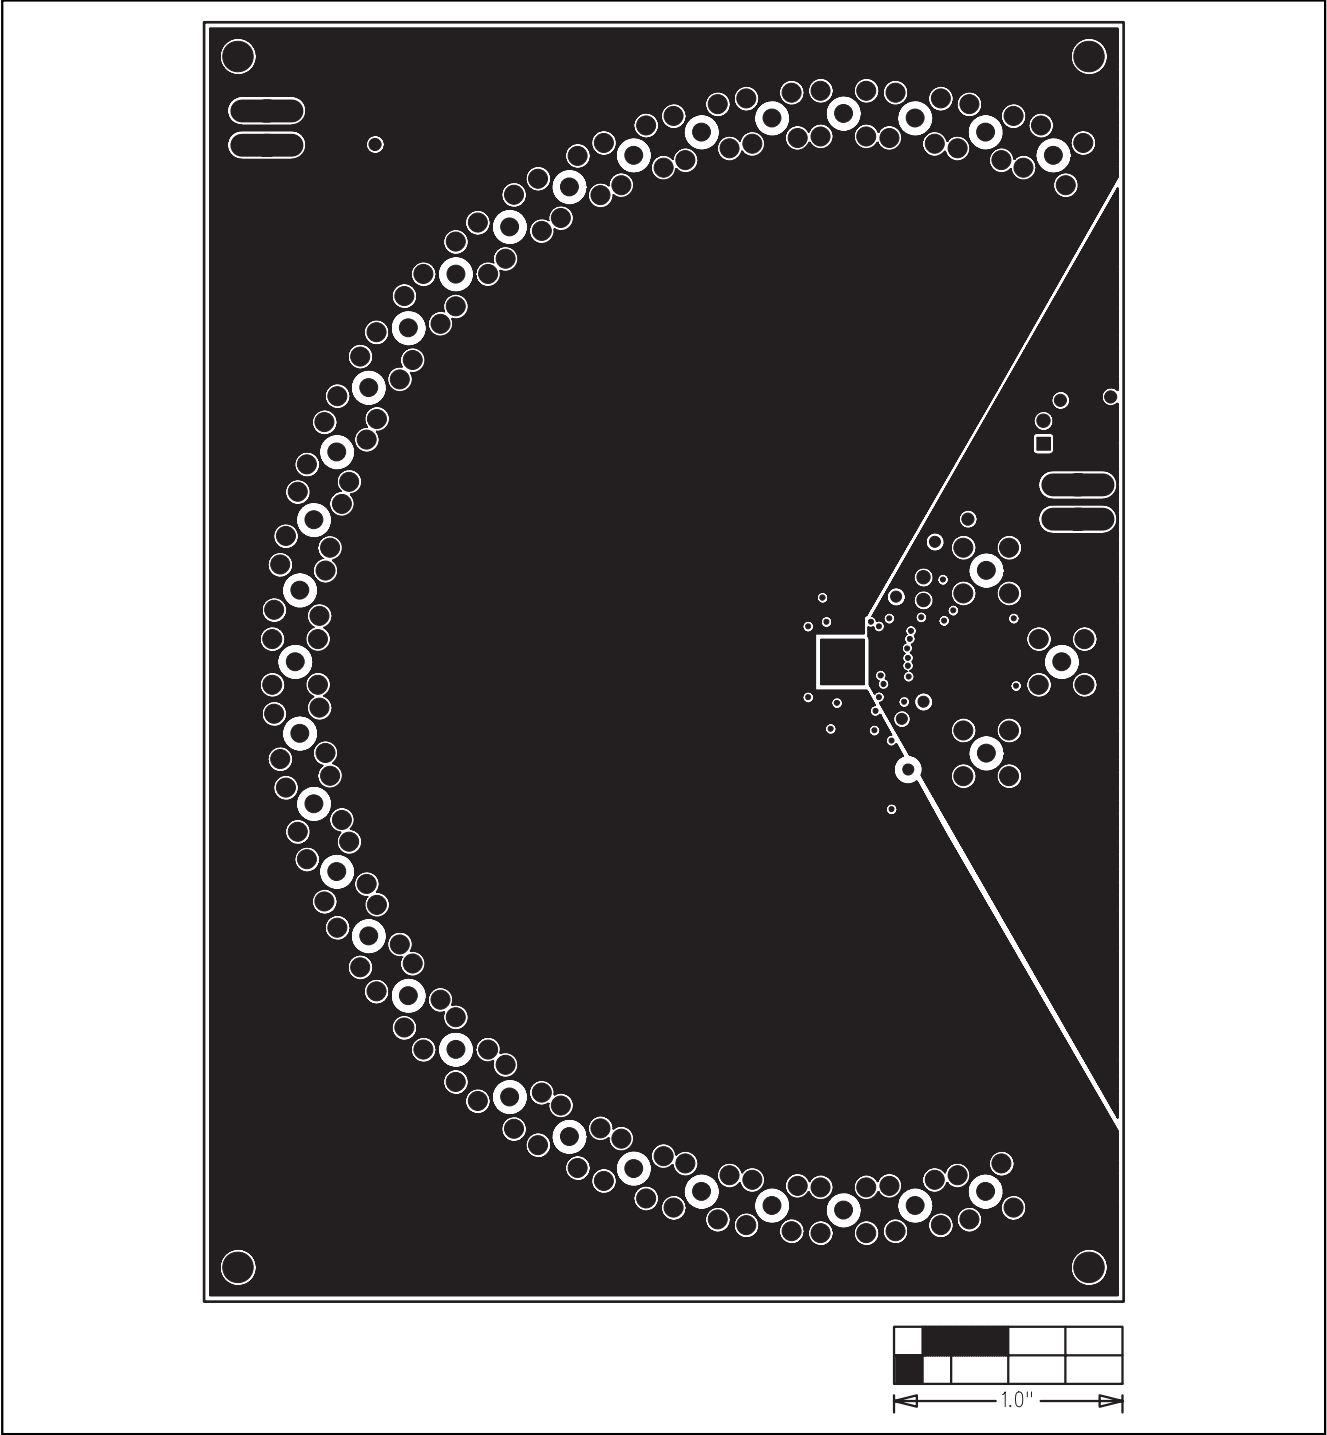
MAX5195 EV Kit PC Board Layout—Power Planes
